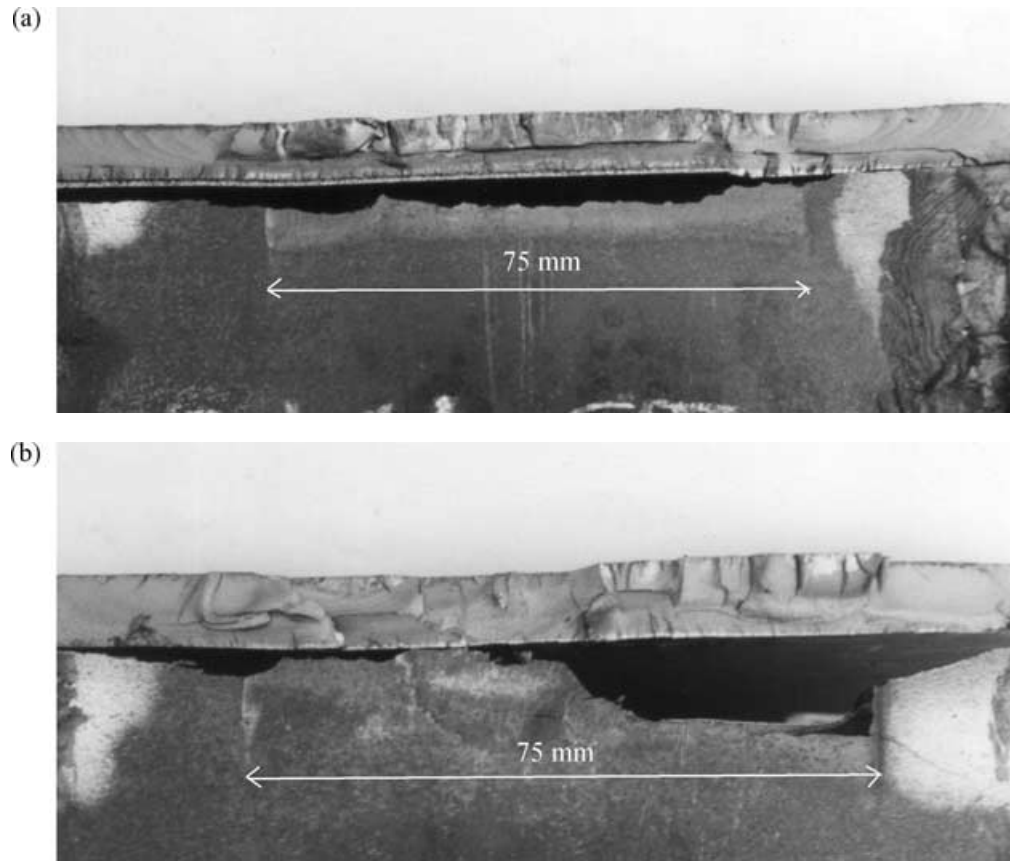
Fracture surfaces of the two indenters after test 6.
